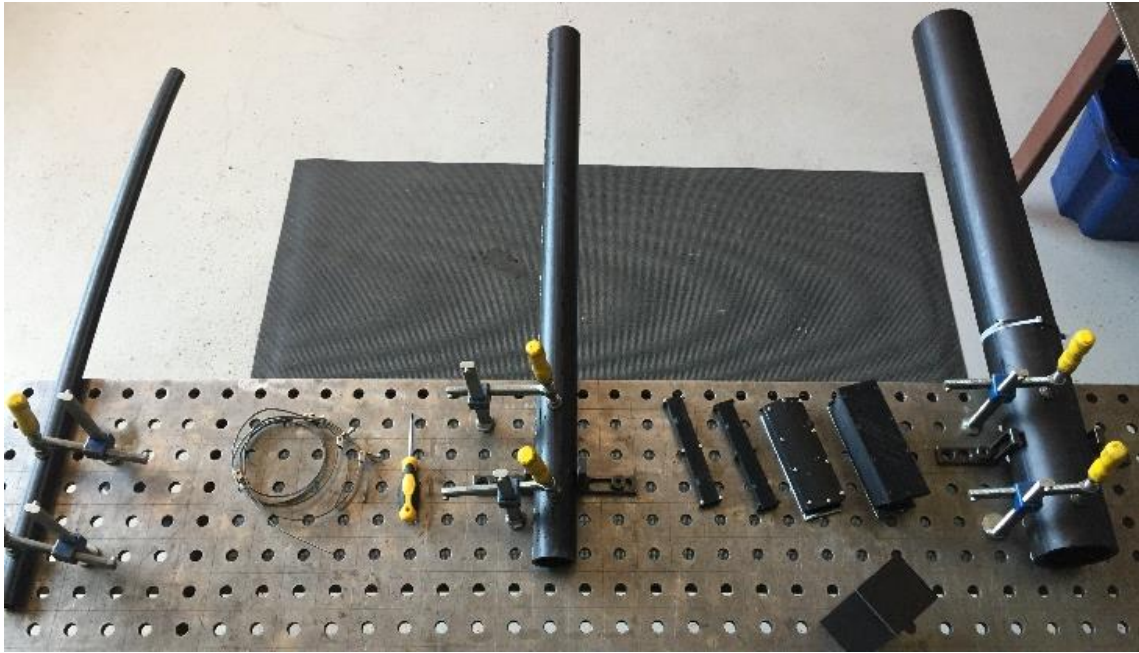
Setup for end-user test. Pipes of 32mm, 64mm and 110mm (left to right), were mounted to a table with easy access (Photo: Kevin Vesterås).
